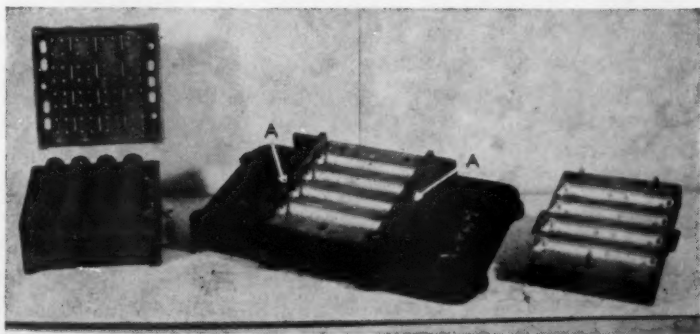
CORES SIMILAR TO THOSE OF FIG. 13 BUT BLOWN IN HORIZONTAL POSITION. SAND CHAMBERS (A) OF BOX ARE HOLLOW WITH HOLES CORRESPONDING TO HOLES IN PLATES TO WHICH THE BOX IS ATTACHED.
